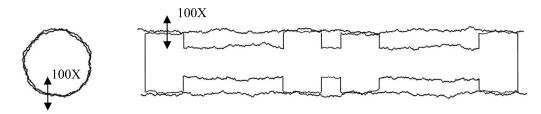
Sectional view of fitting surfaces of valve core and valve sleeve.
